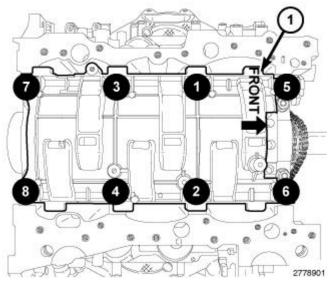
Windage Tray With Main Bearing Cap Bolts Installation Sequence Courtesy of CHRYSLER GROUP, LLC
